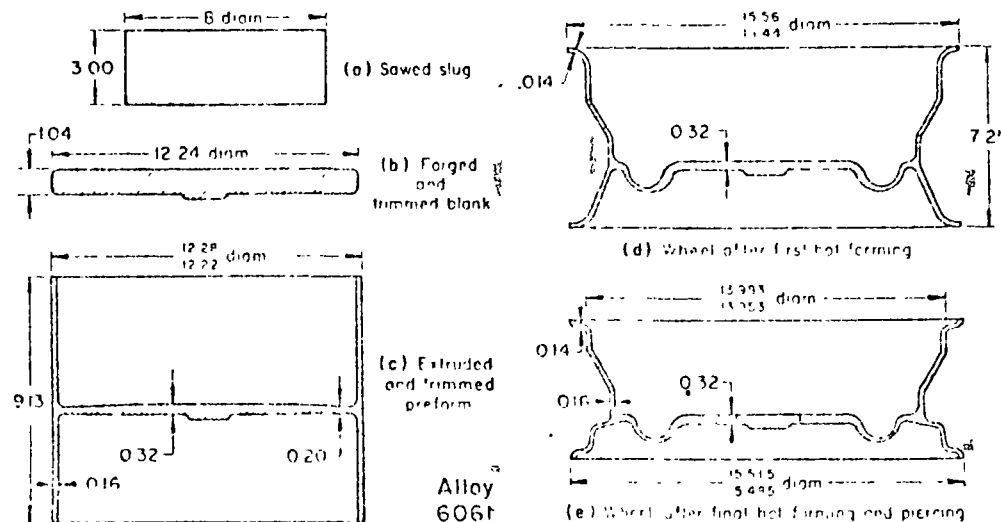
Stages in the production of an automobile wheel by forging, extruding and hot forming (Example 1.31)
